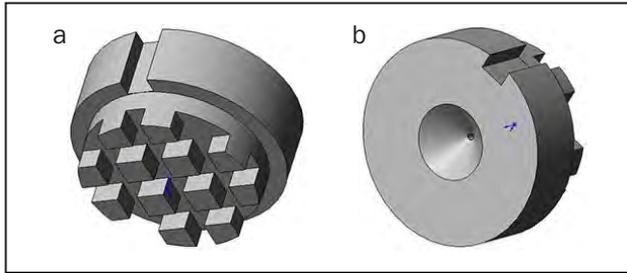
Sliding element. View from: a – the supporting side surface; b – the platform side
